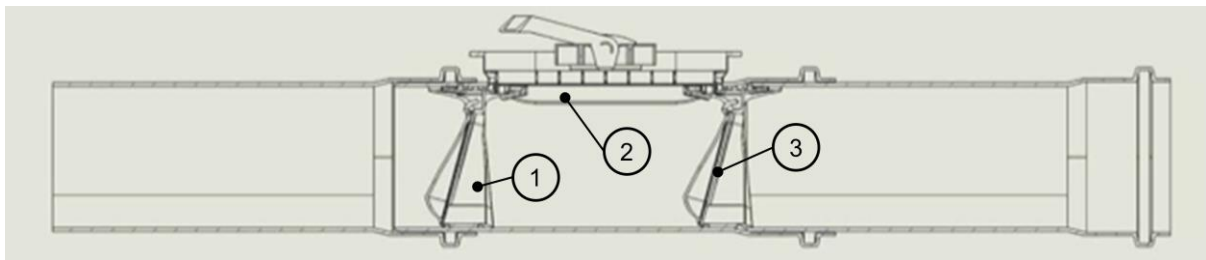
Backwater valve kit (1-ring-casting with flapper, 2-small flat fixing part, 3- sealing rubber)
